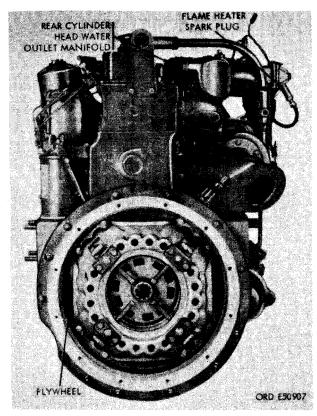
LATE MODEL LDS -427-2 ENGINE ASSEMBLY - REAR VIEW.
